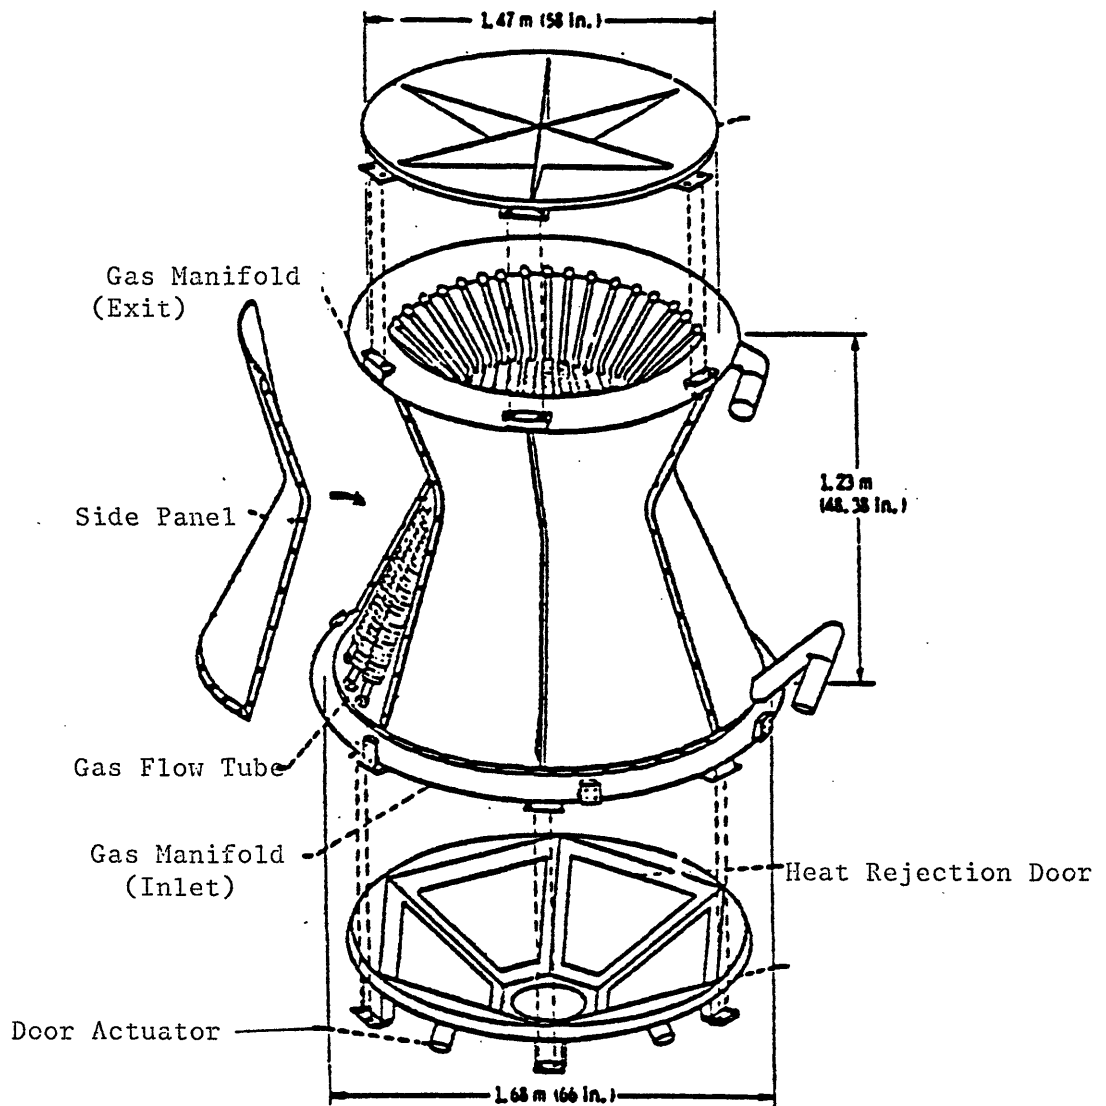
Exploded View of Receiver, LiF Heat Storage System
